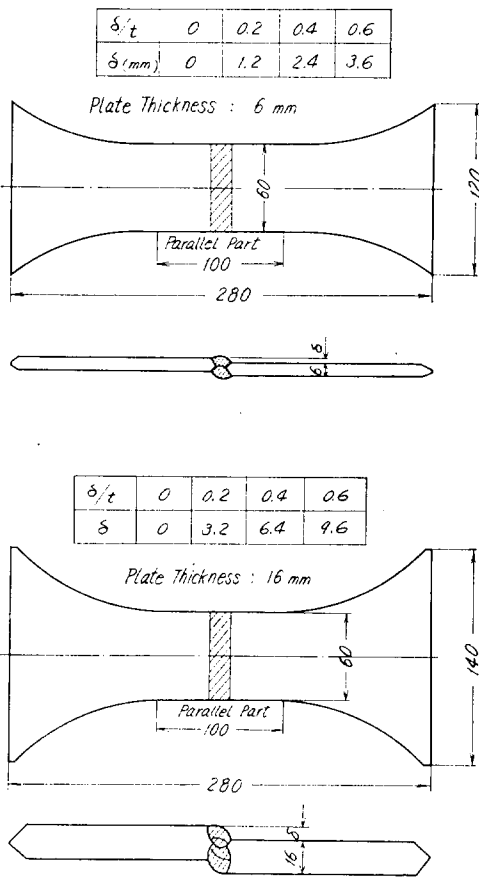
Shapes and Dimensions of Test Specimen
